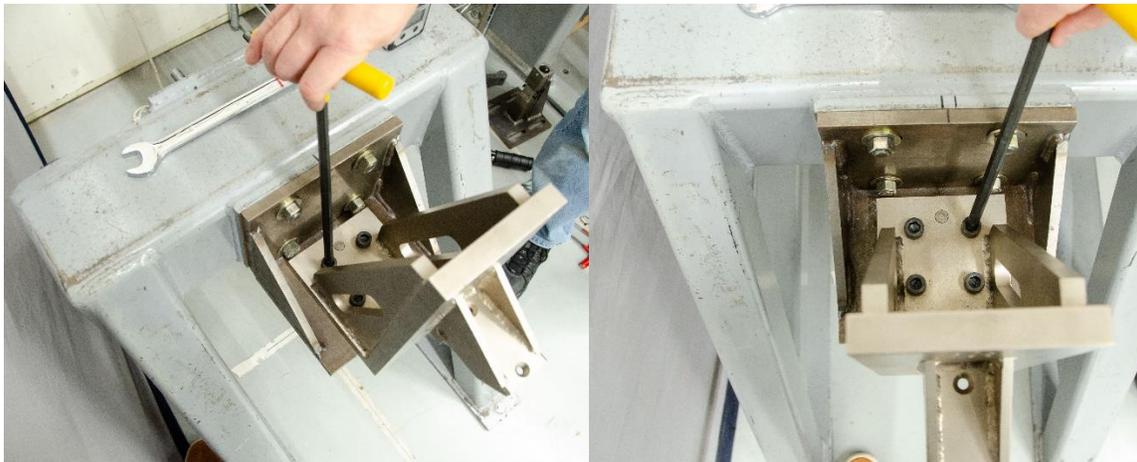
Install inversion/eversion bracket to level rigid surface
